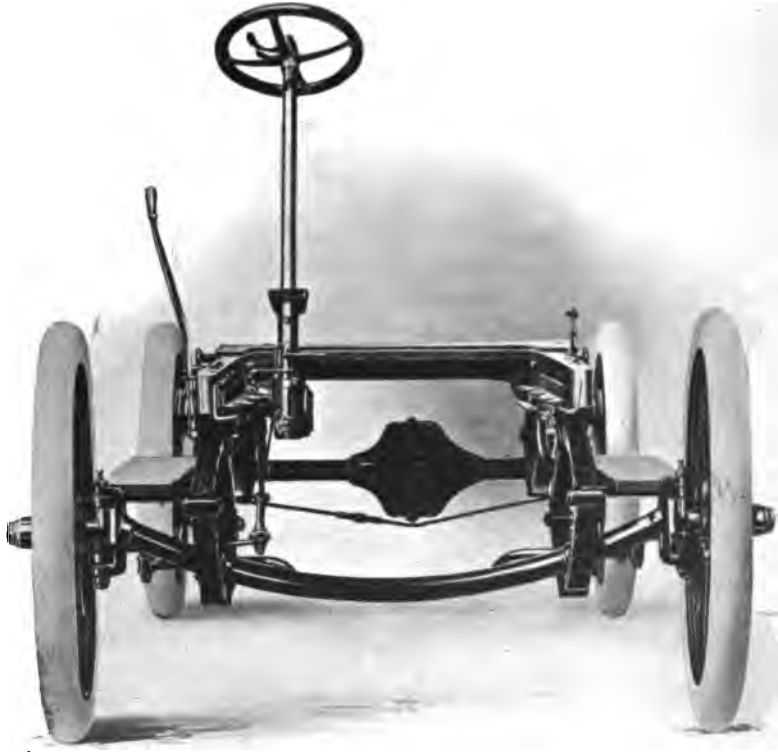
Front View, Franklin Spring Suspension, Showing Tubular Front Axle.
